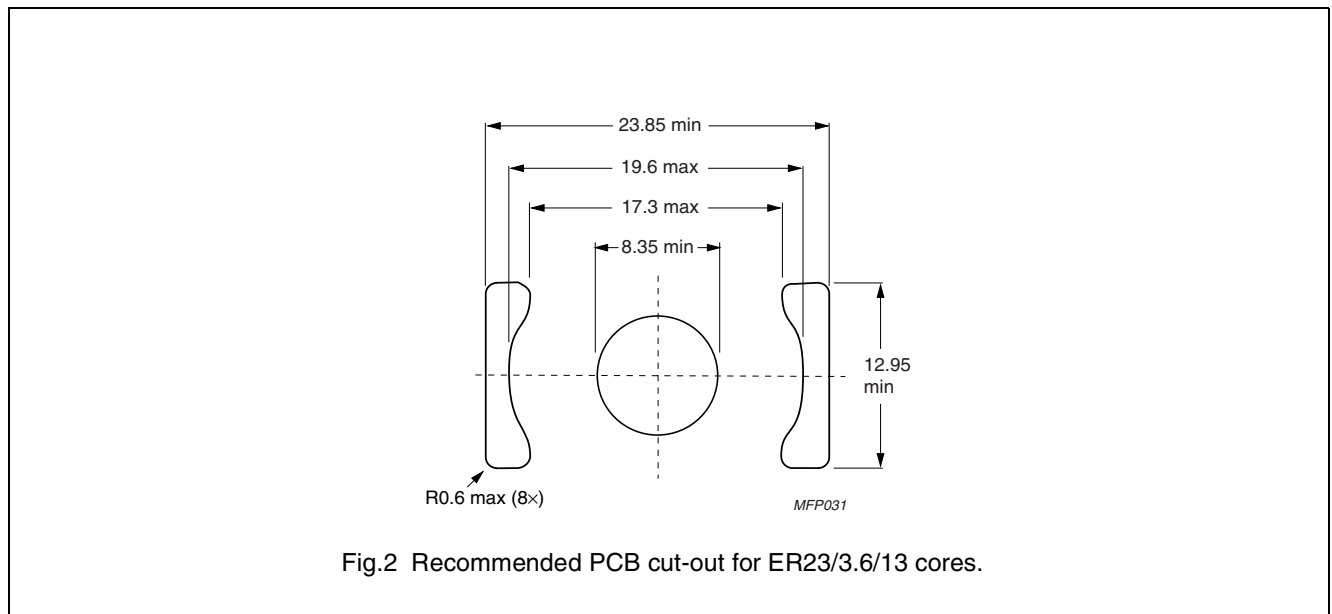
Recommended PCB cut-out for ER23/3.6/13 cores.
